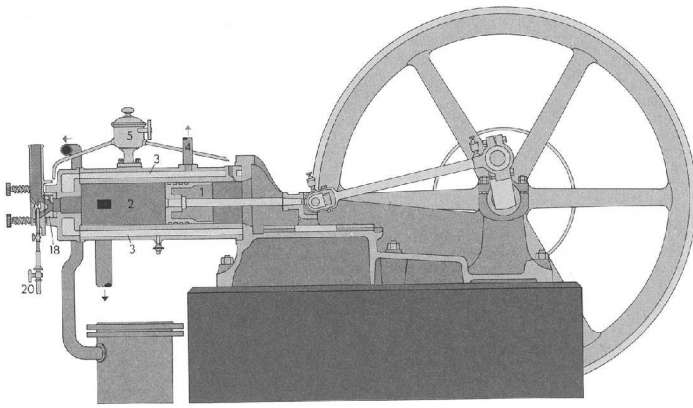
Sectional View of the Otto Silent Four-Stroke Gas Engine of 1876
